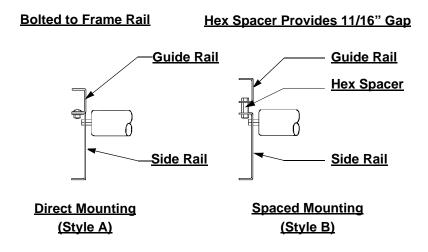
Direct Mounting and Spaced Mounting (2 5/8" channel guide shown)
